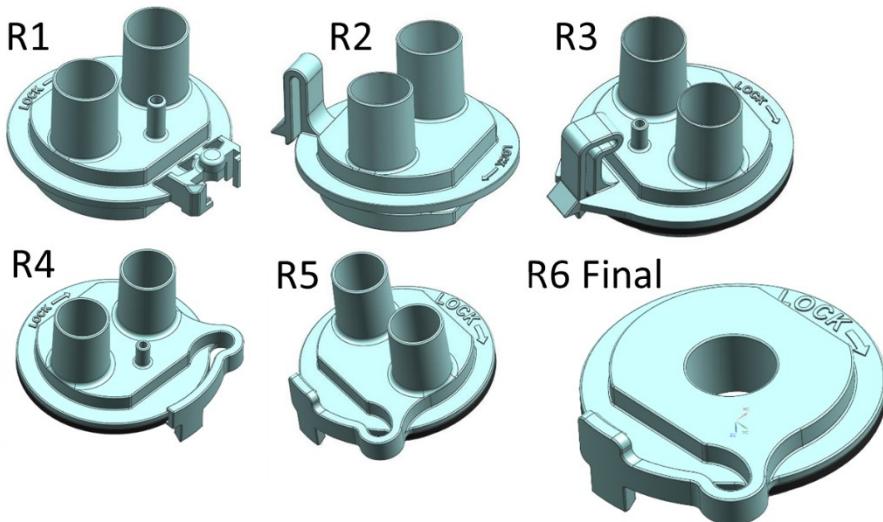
ABS/PETG 3D Printed Adapter Versions
